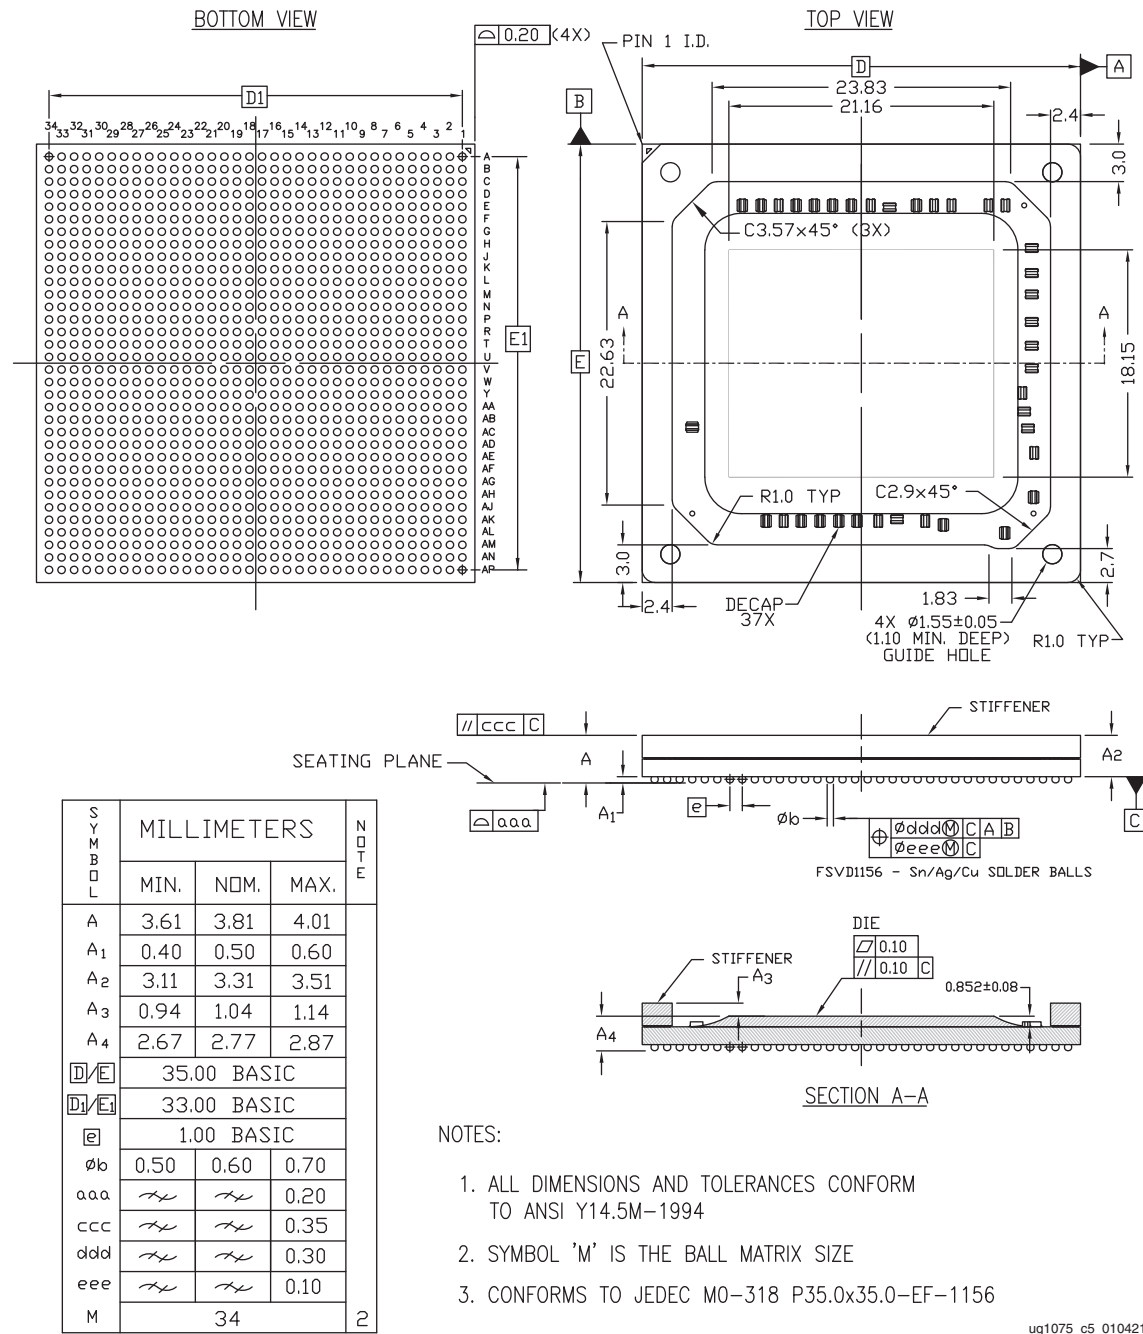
Package Dimensions for FFVD1156 (XCZU21DR)
